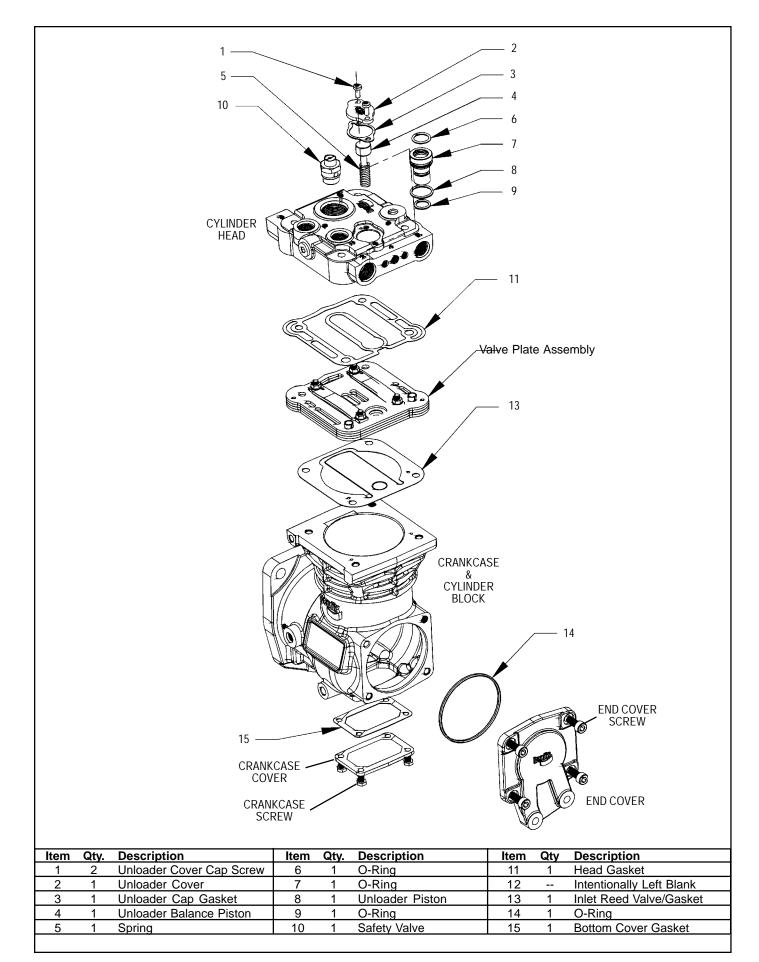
BA-921 EXPLODED VIEW OF SERVICEABLE PARTS
